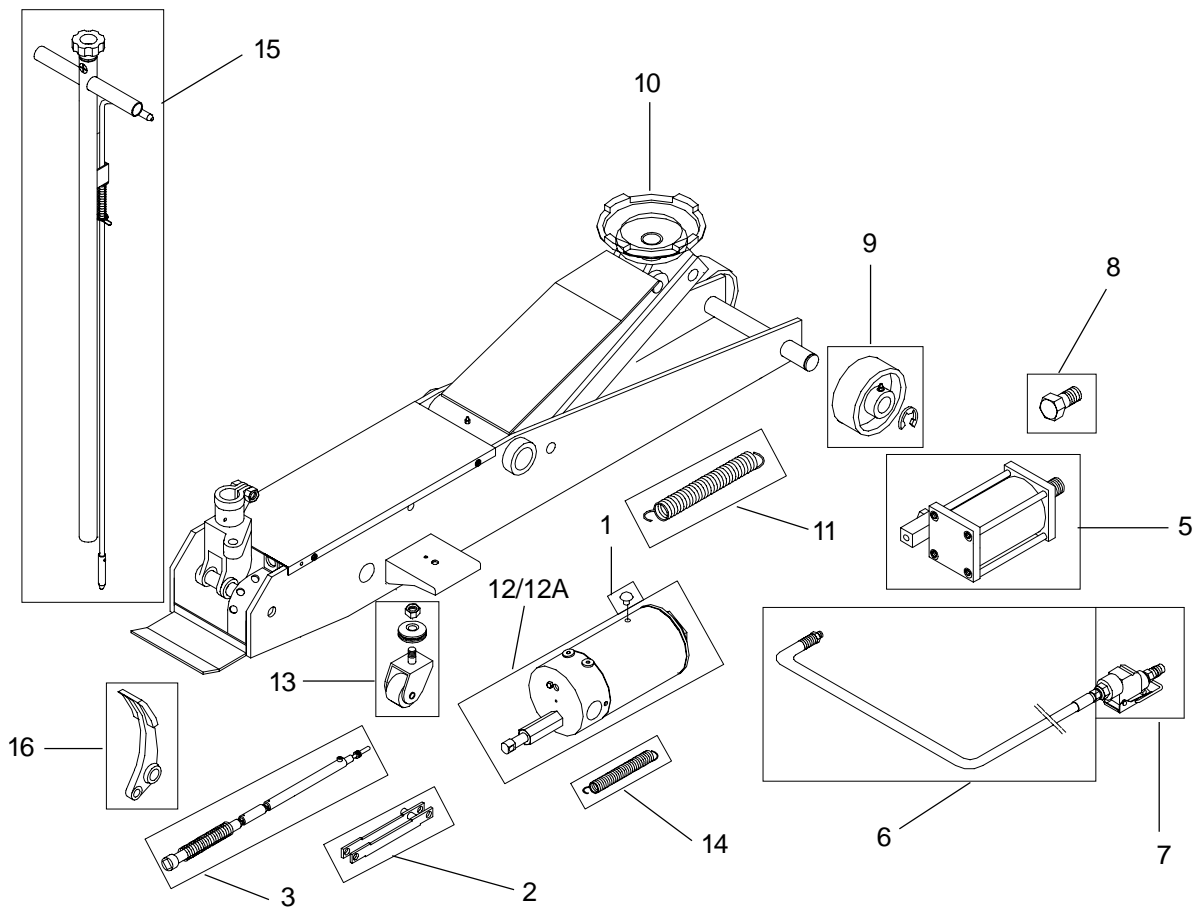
Replacement Parts Illustration for Model 22100, 22101
